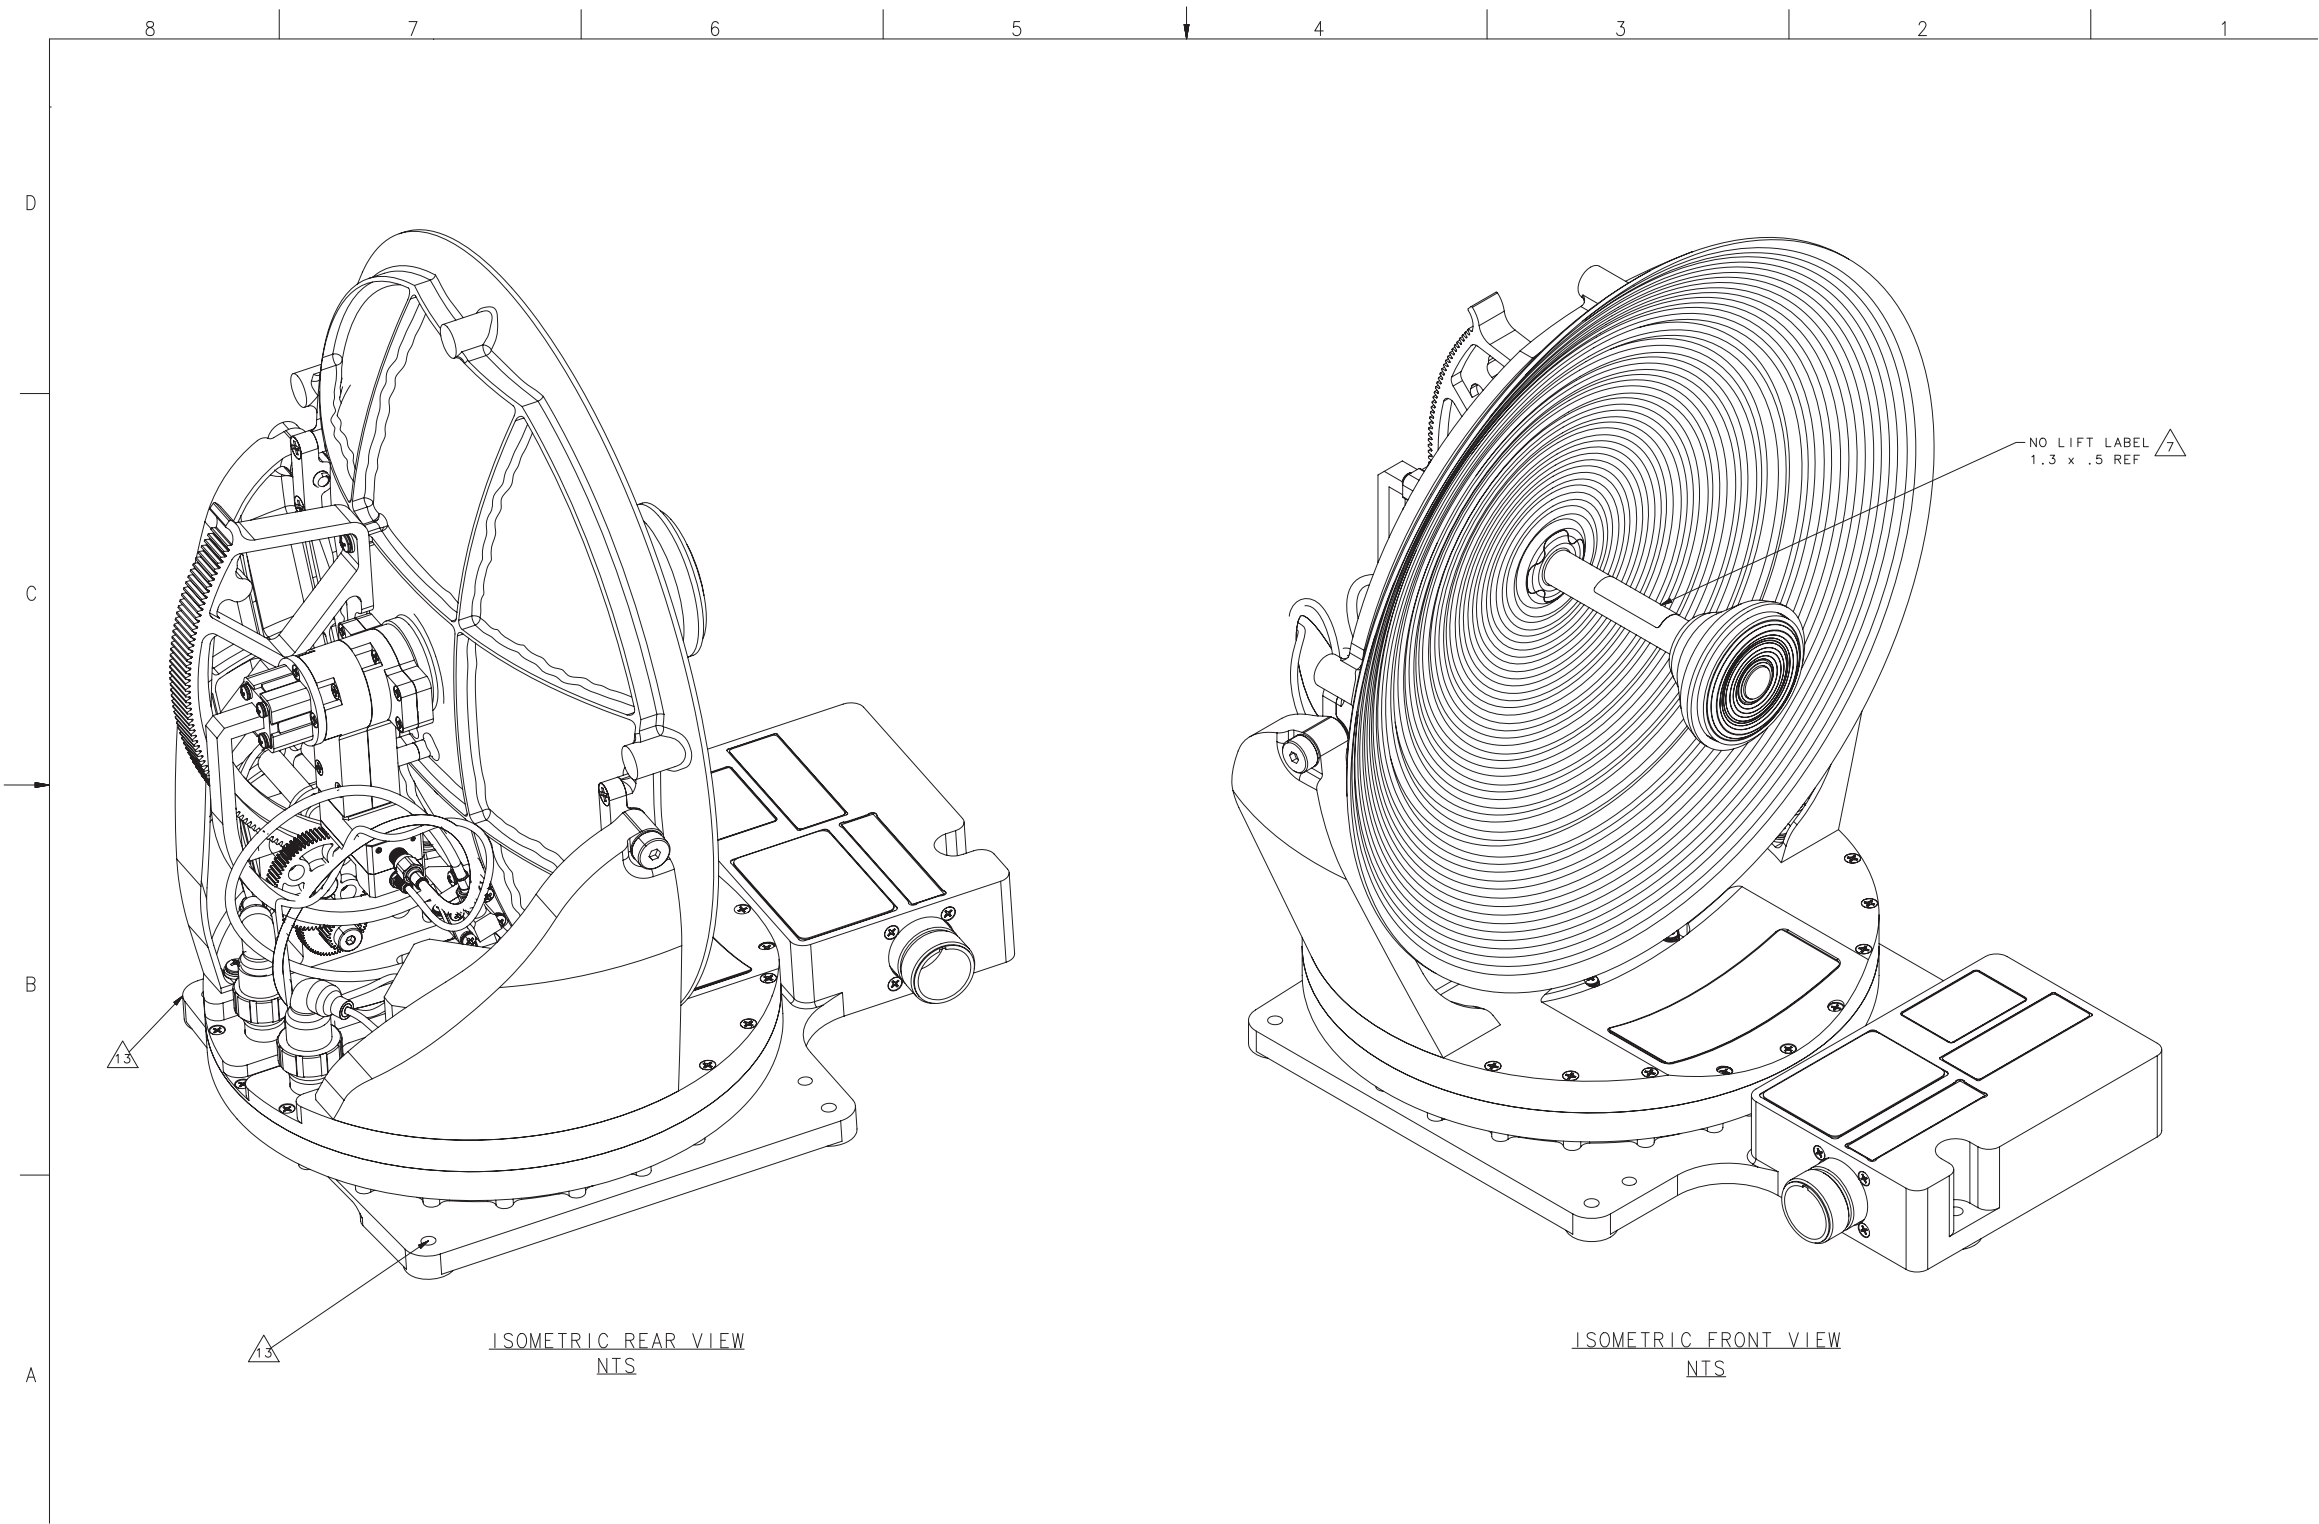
TMA Outline and Installation Drawing (Sheet 2 of 4)
